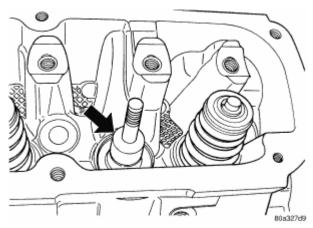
Identifying Valve Seal Courtesy of CHRYSLER LLC
